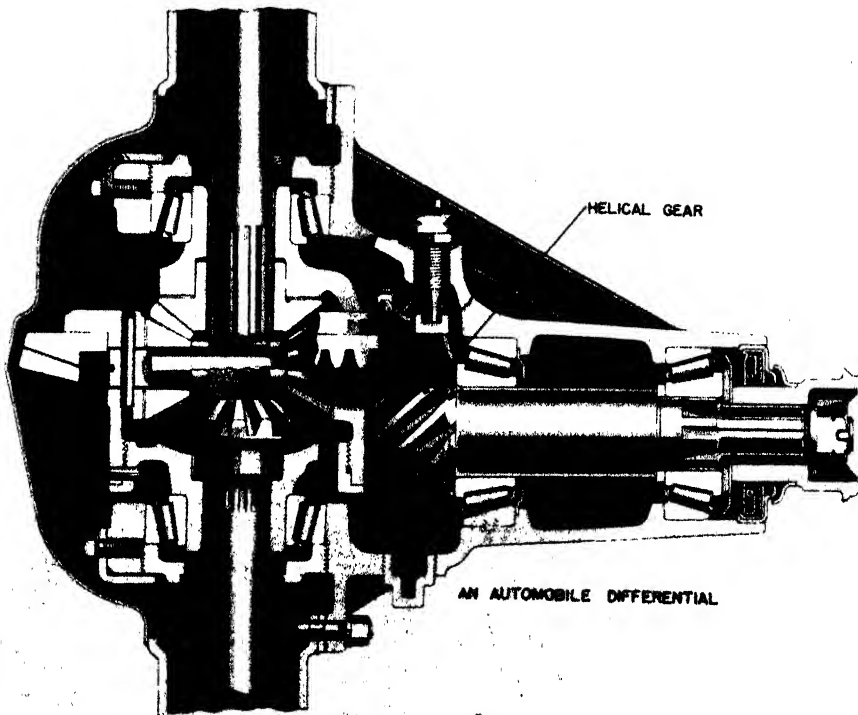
HELICAL GEAR AND PINION. (Courtesy, Chrysler Corporation.)
